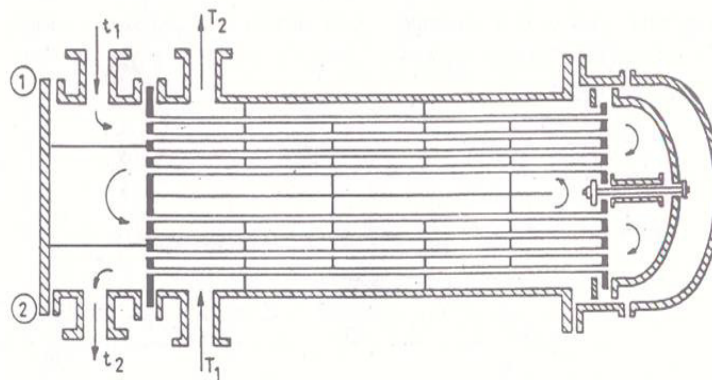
Schematic of a 2 – 4 shell and tube heat exchanger (with floating head construction)
